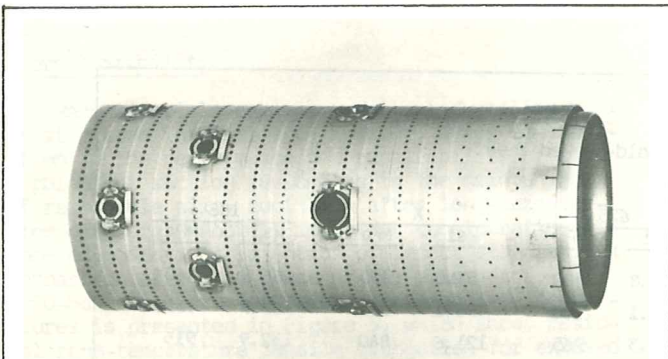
Alloy No. 230 combustor can for Avco Lycoming Textron AGT 1500 engine, fabricated by Stolper Industries.
